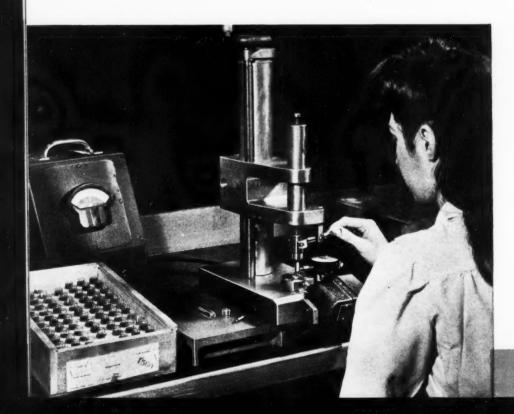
Inspecting a Rotor-shaft Pivot for Concentricity. A Dial Indicator Gage Measures Shaft and Electric Limit Gage Measures Cone, which has a Tolerance of Only 0.0001 Inch
